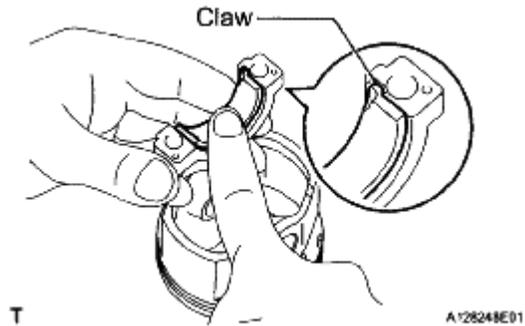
Aligning Bearing Claw With Groove Of Connecting Rod Or Connecting Cap
